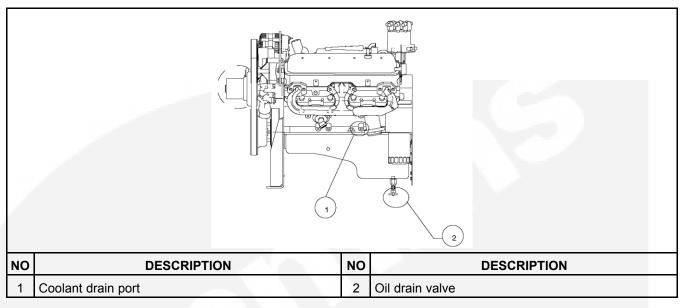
DRAIN PORTS LOCATIONS FOR ENGINE OIL AND COOLANT
